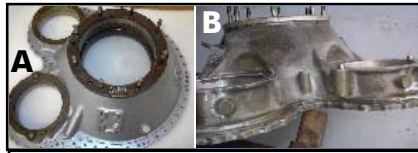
Stripping of hard coatings (aluminized epoxy and varnish) from propeller gear box and housing.
